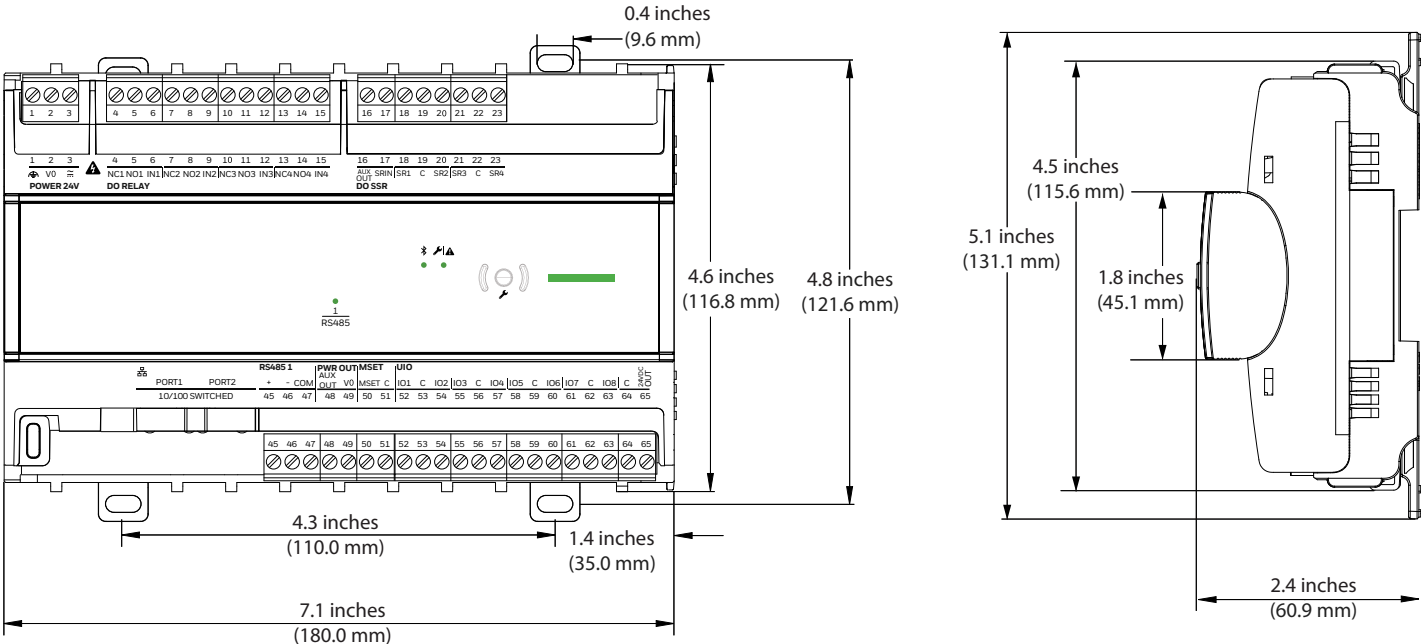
Alerton Unitary Controller (Small Housing) Dimensions
